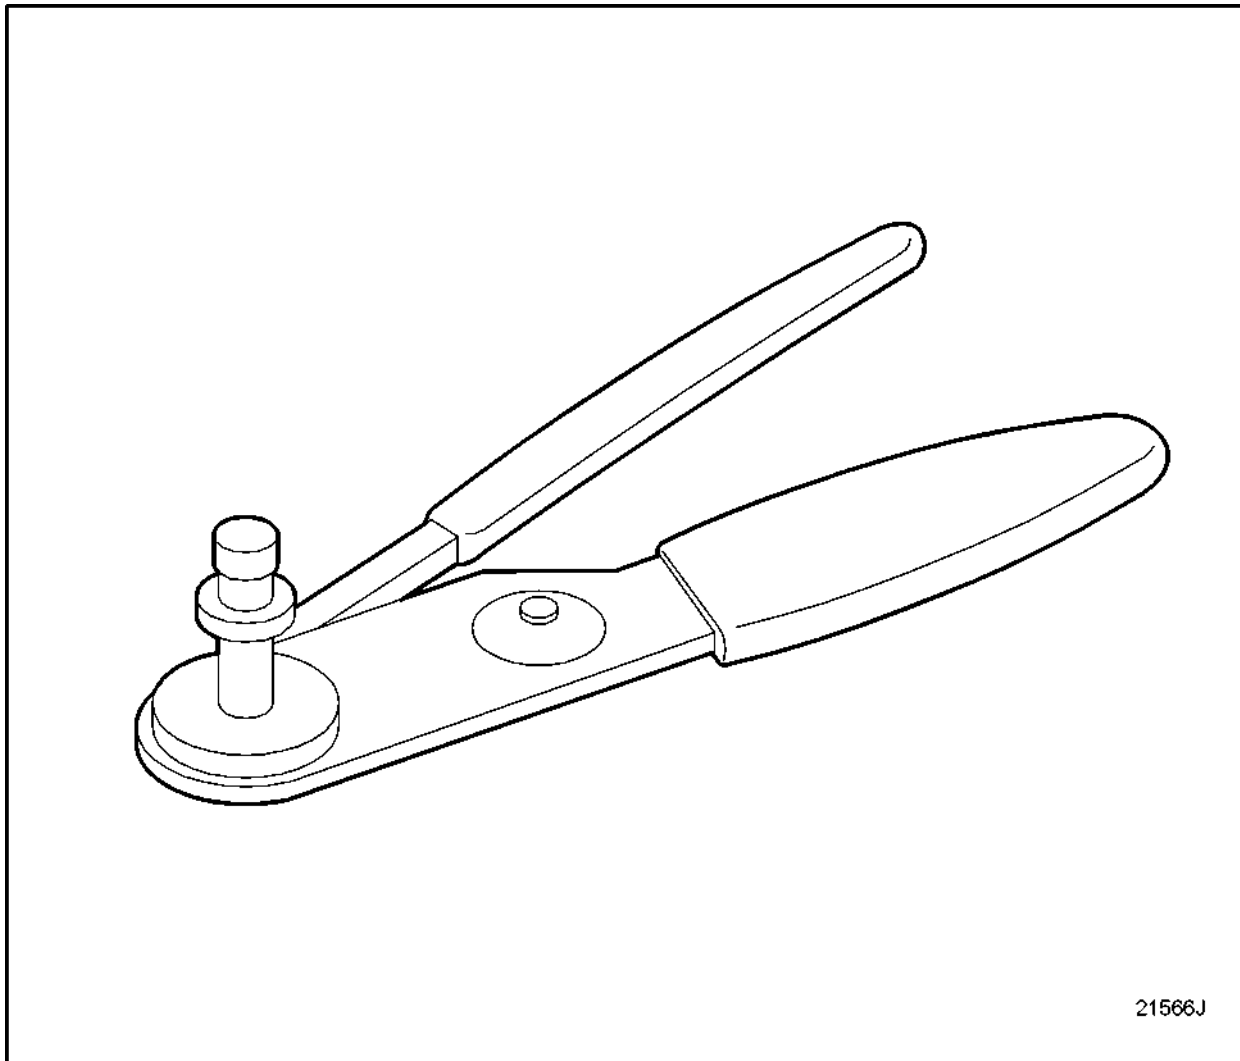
Terminal Crimper (Deutsch),J 34182
